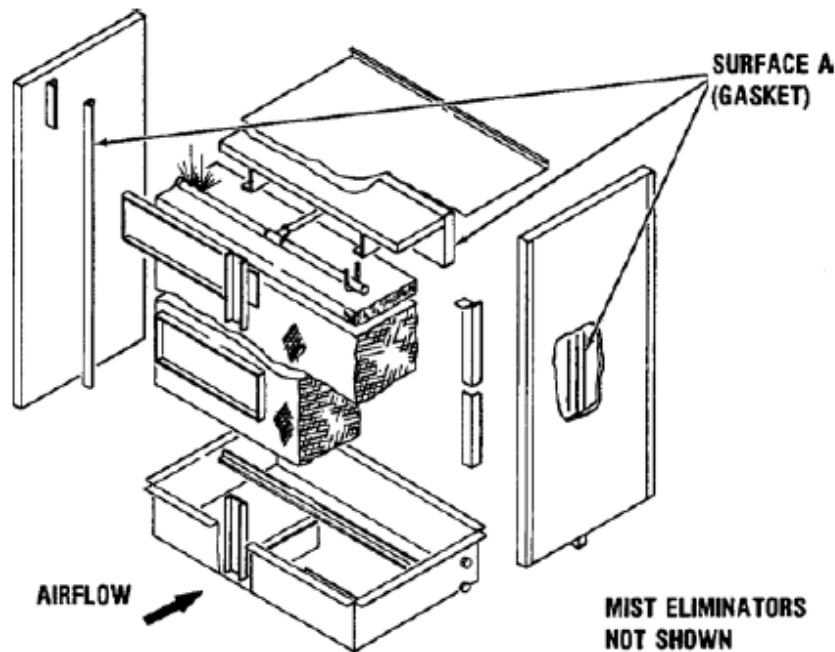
EVAPORATIVE COOLER EXPLODED VIEW
